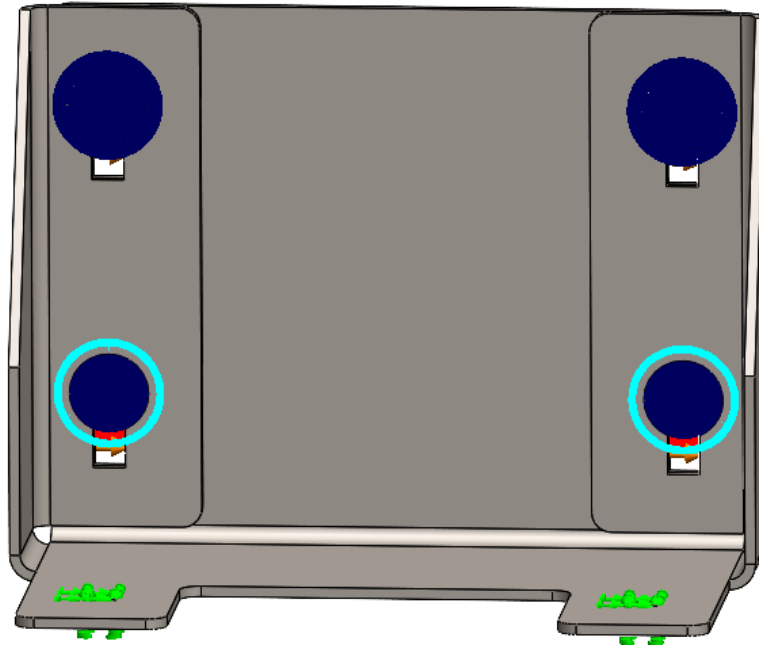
BRACKET 8L FIXTURES AND LOADING CONDITIONS.
